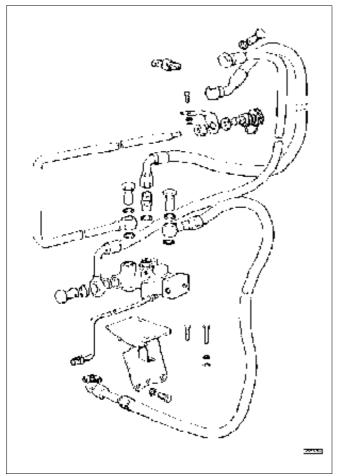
Component parts of trailer braking system (FRANCE version).
